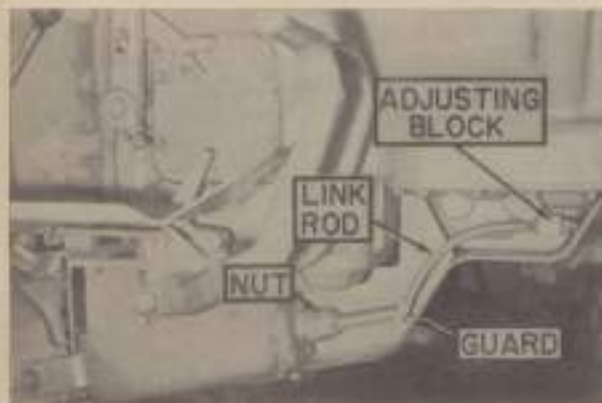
Hydraulic pump control linkage and adjustments. See text.
